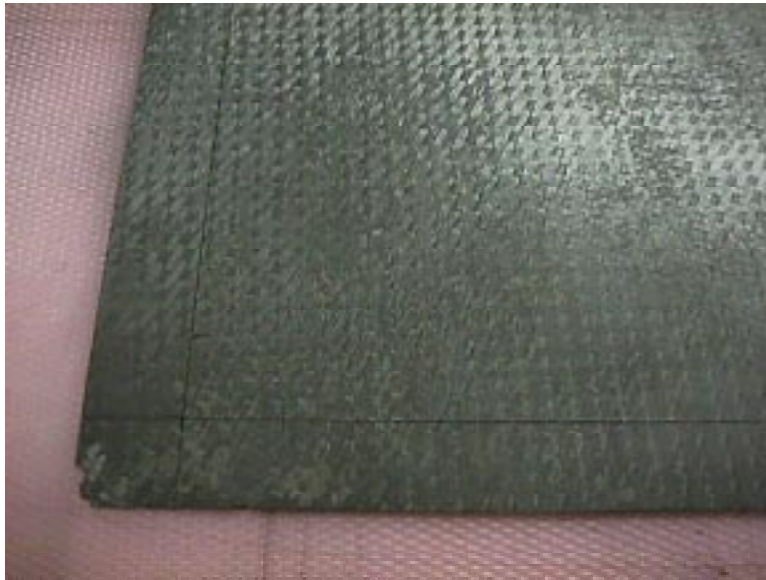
Carbon-carbon composite facesheet prior to trimming.
